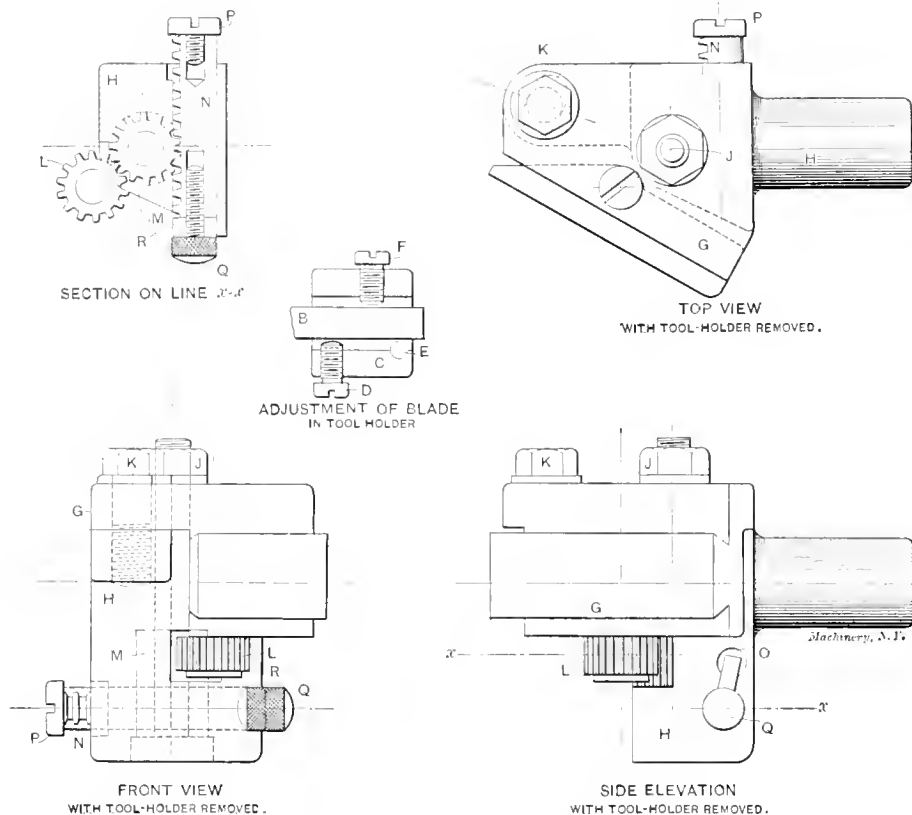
Details of Construction of the Cone Point Turning and Cutting-off Tool shown in Fig. 5.
